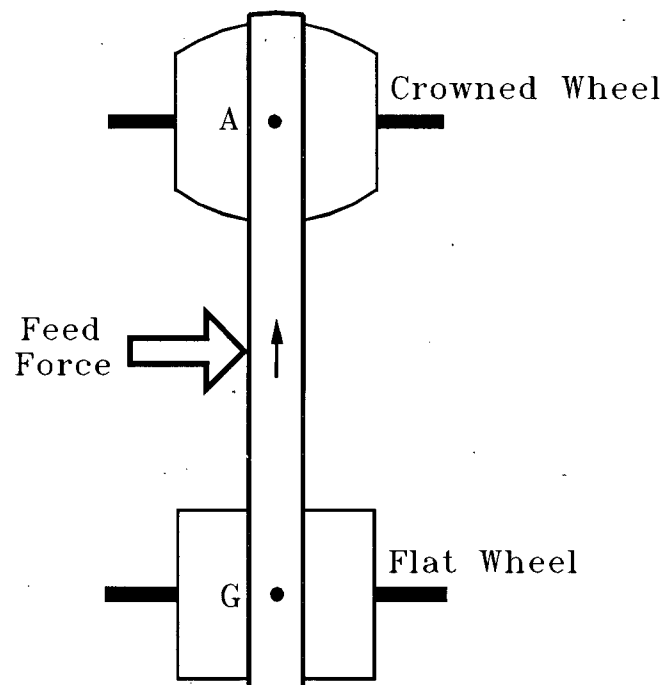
Wheel Crown & In-feed “Cutting” Force Equipment Set-up
